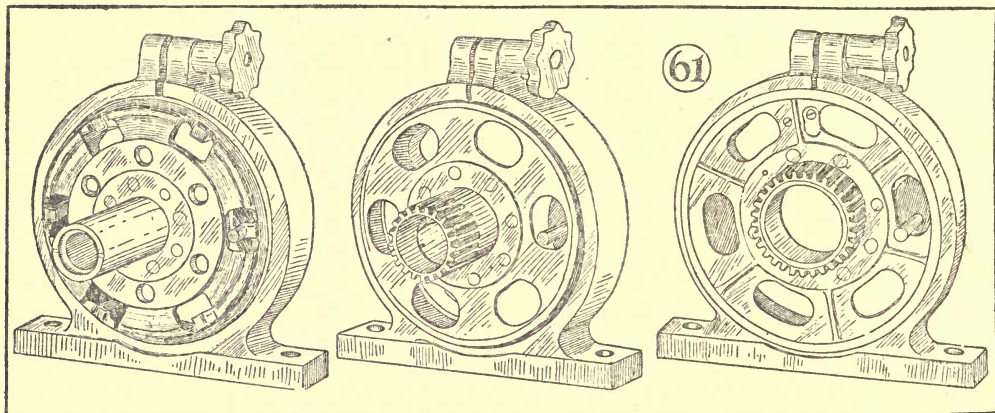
A transmission drum clamping device for holding the drums while reaming the bushings. The tool is bolted to the bench and the faces of drums are not injured
